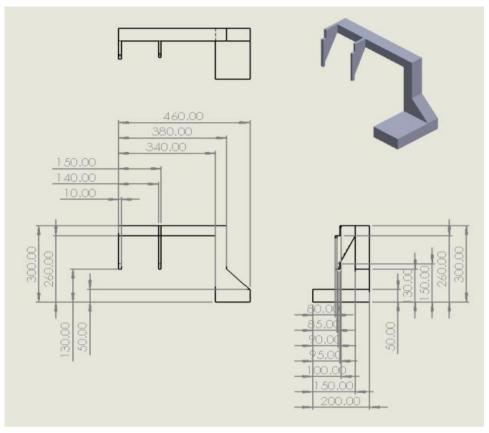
Seatbelt release mechanism design using SolidWorks
